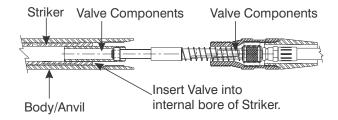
Insert Valve into Body/Anvil and Striker.
